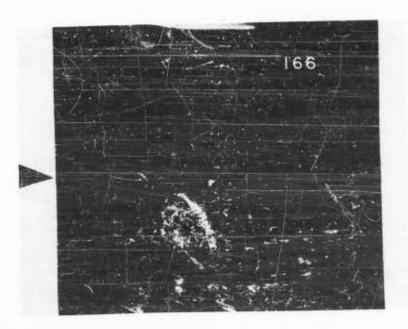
FAILURE IN SPECIMEN NO. 166
